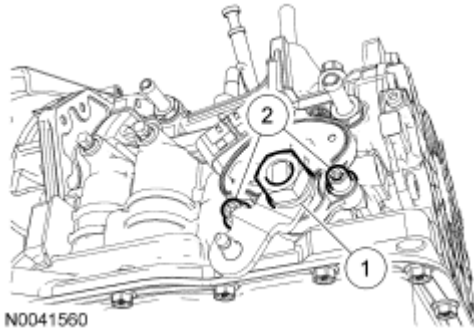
Identifying Manual Control Lever Nut And TR Sensor Bolt
